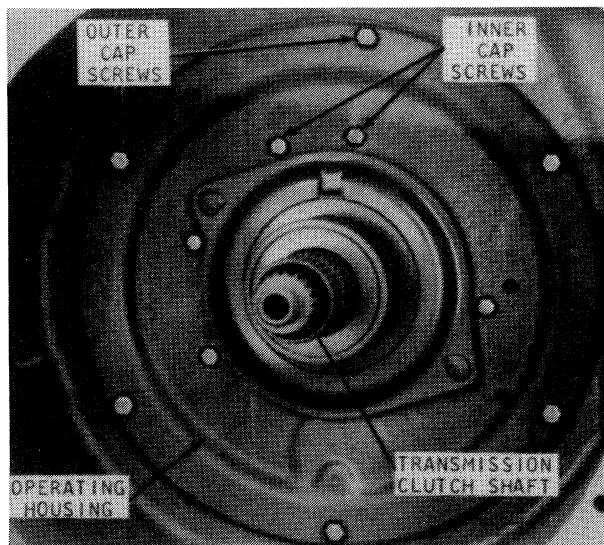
View of clutch operating piston housing installed in clutch housing. To remove housing, first remove clutch drive shaft, inner cap screws and outer cap screws.
